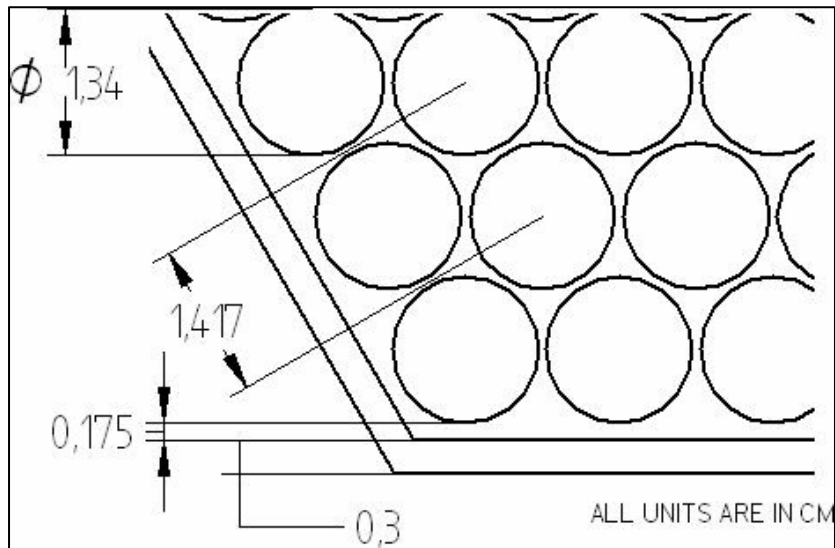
Fuel pin and assembly layout – assembly close-up. [24]
